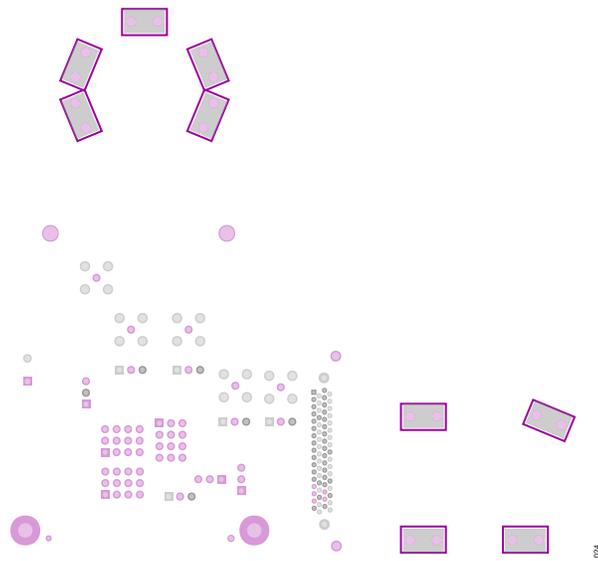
EVAL-ADGM3144SDZ Soldermask Bottom
